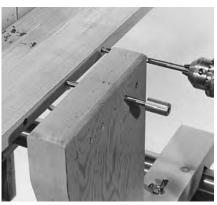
If you use a hole-spacing guide, you can do accurate work without needing layout. After you bore each hole, engage the pin. This positions the workpiece for the next hole. Spacing is determined by placing the guide pin in the appropriate hole in the guide.
